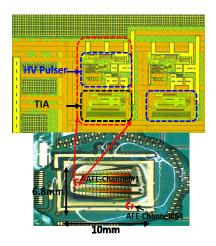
4X16 AFE IC COB assembly on PCB and the chip micrograph
